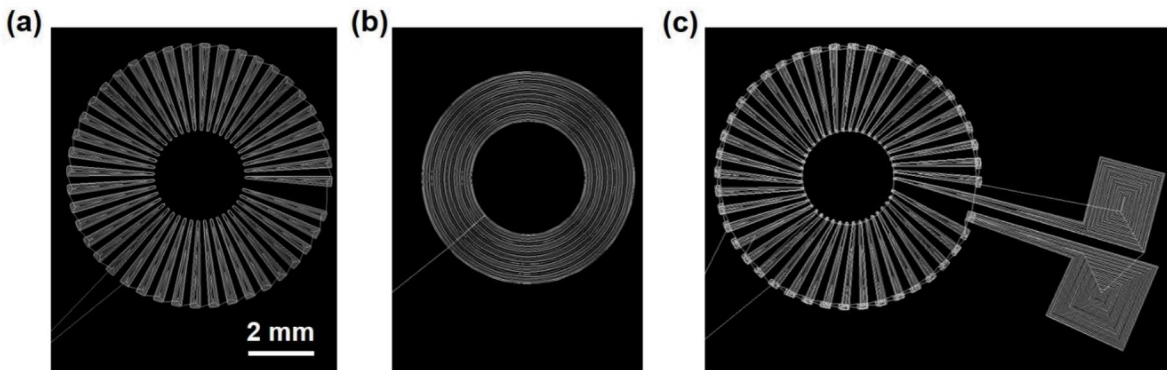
Toolpath drawings for printed layers 1-3 in (a)-(c), respectively.
